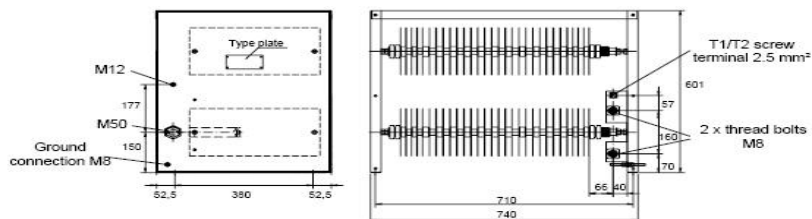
Dimension drawing for braking resistor (25 kW)
